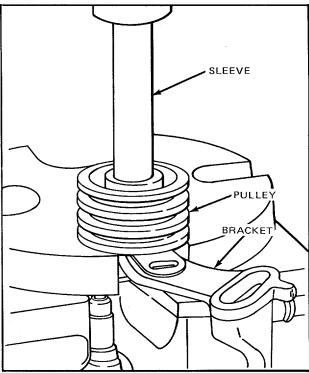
Removing Shaft and Bearing Assembly and Bracket from Idler Pulley
